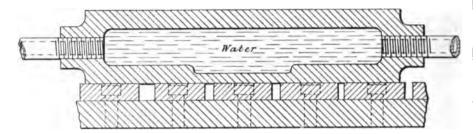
Wicks rotary typecaster ; soft moulds. Scale : full size.
